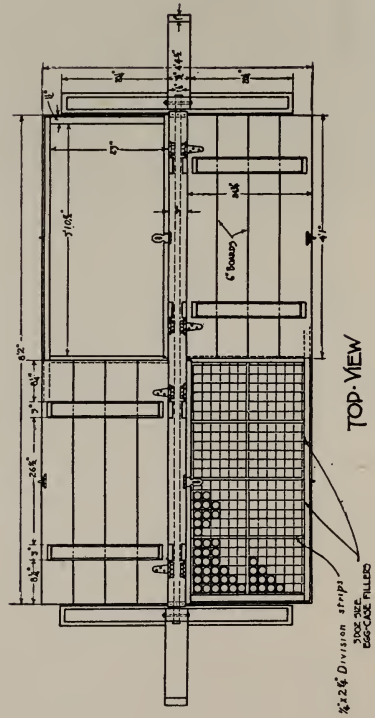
Working plans of hatching egg cabinet, showing construction in detail.
